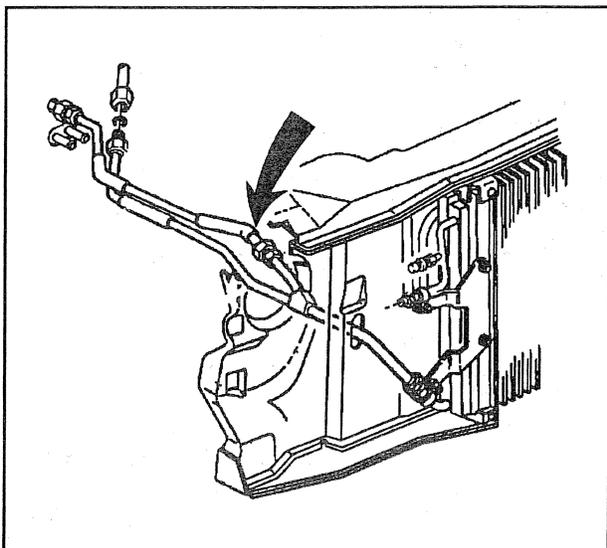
Auxiliary Evaporator Tube Location (Suburbans with Aux. A/C)
